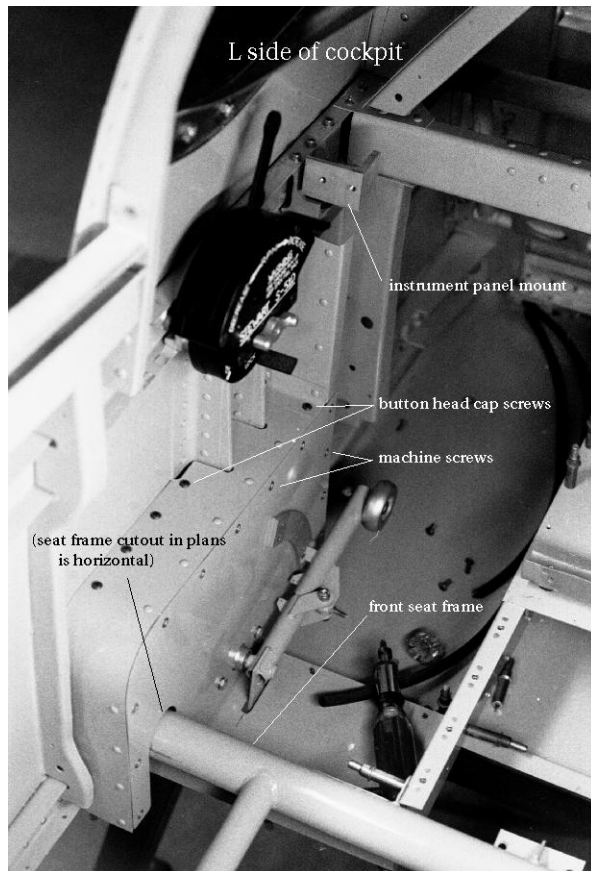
The landing gear selector lever normally mounts on the console. The cut-out for the front seat frame on this one does not conform to drawing 8141. You have to be able to remove the console to get the seat frame out, so it must be installed mainly with screws.
